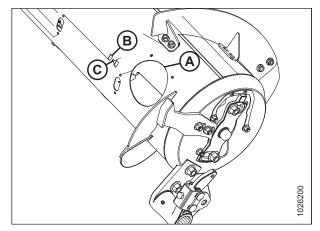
Medium Configuration Flighting Plug – Right Side
